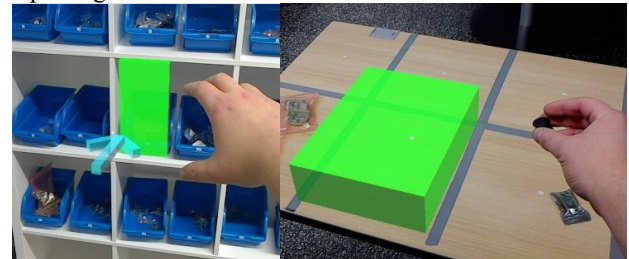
The Augmented Reality picking instructing telling the participant to pick a part from a bin using green rectangles (left) and to place the previously picked part (right).
